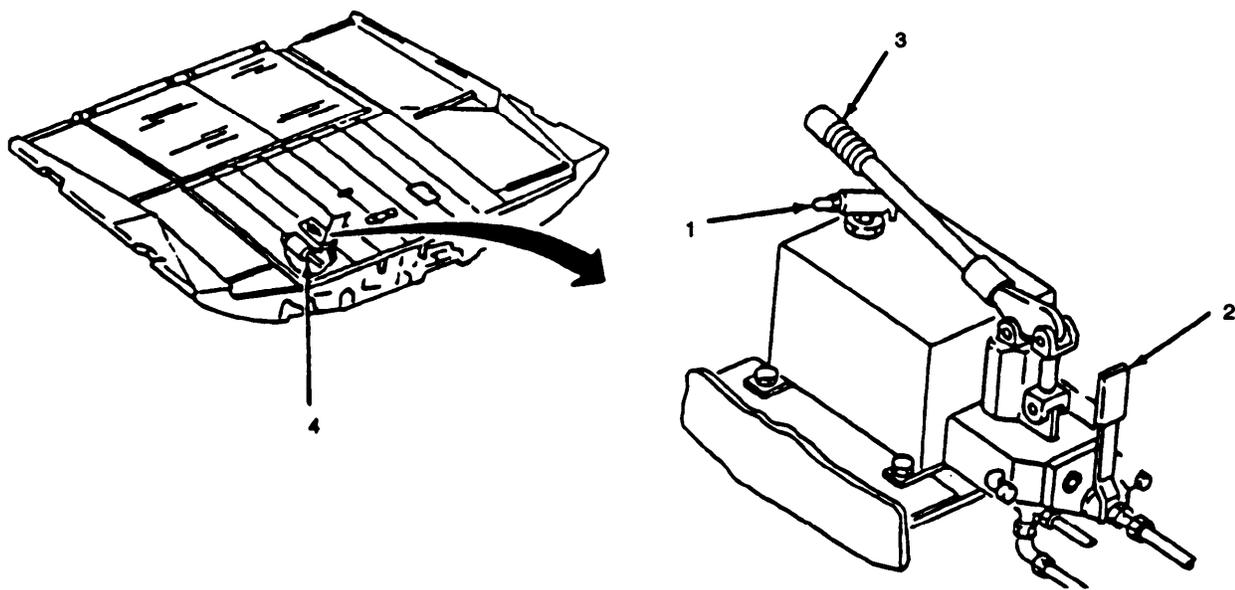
Hydraulic Cylinder and Piston, Test.
